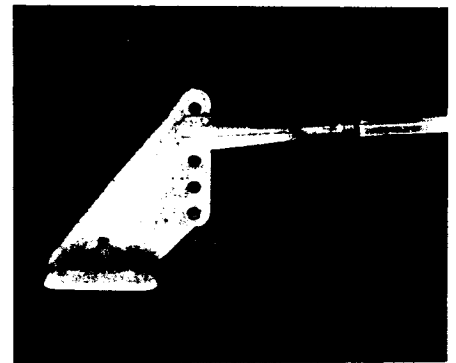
Screw a completely threaded rod into the inner Gold-N-Rod to a depth equal to about half its length or half an inch. Then attach a clevis and clip it to a control horn.
